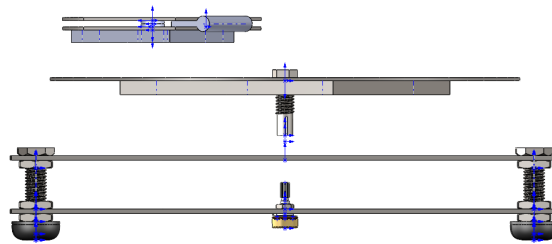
An exploded view of the circular disc interface showing the three main components. The top component is the foot pad, the middle is the circular disc and the bottom component is the frame.
